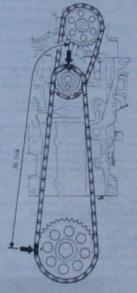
Timing mark location and arrangement on sprockets and chain (Sec 9)
